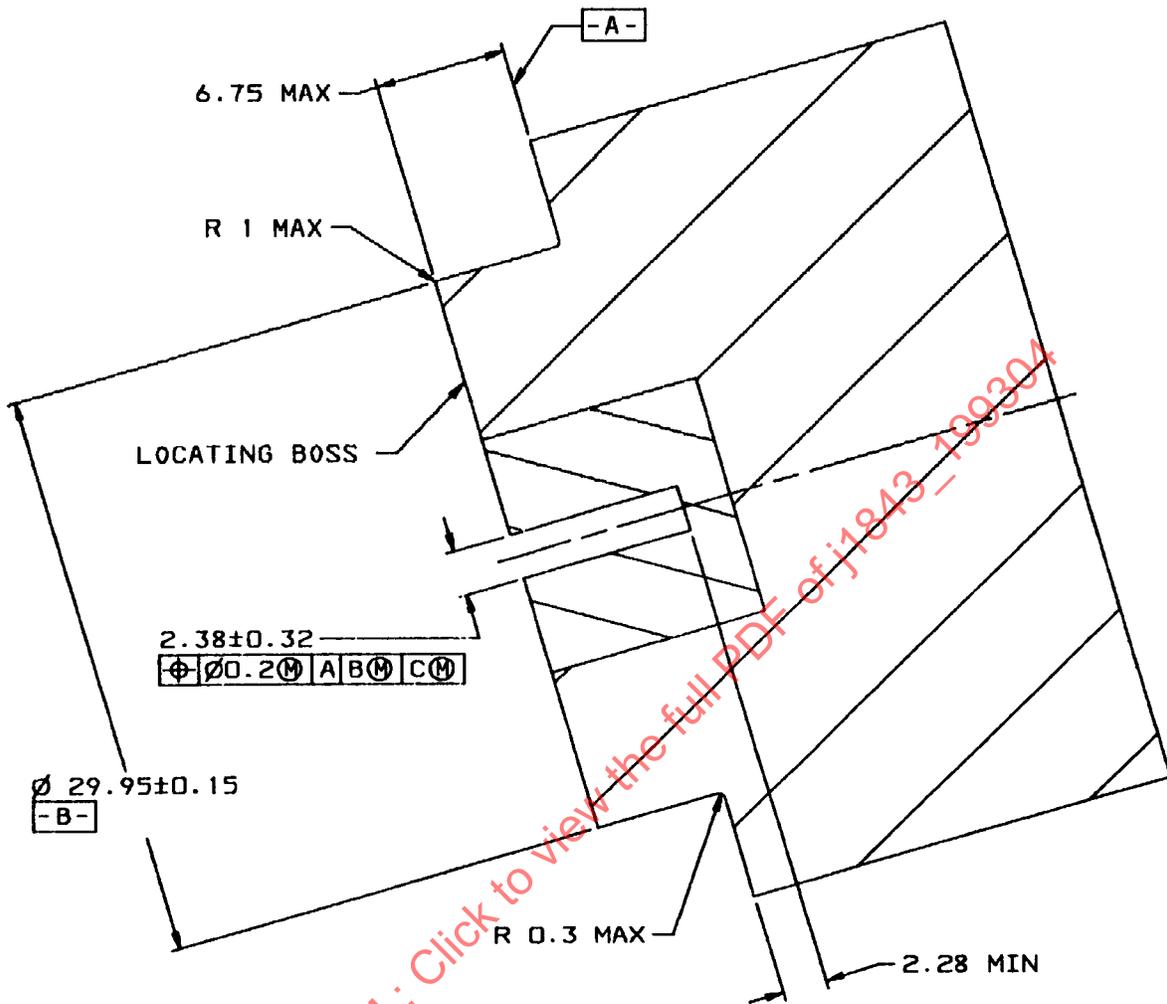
APS MOUNTING SPECIFICATIONS SECTION A-A
